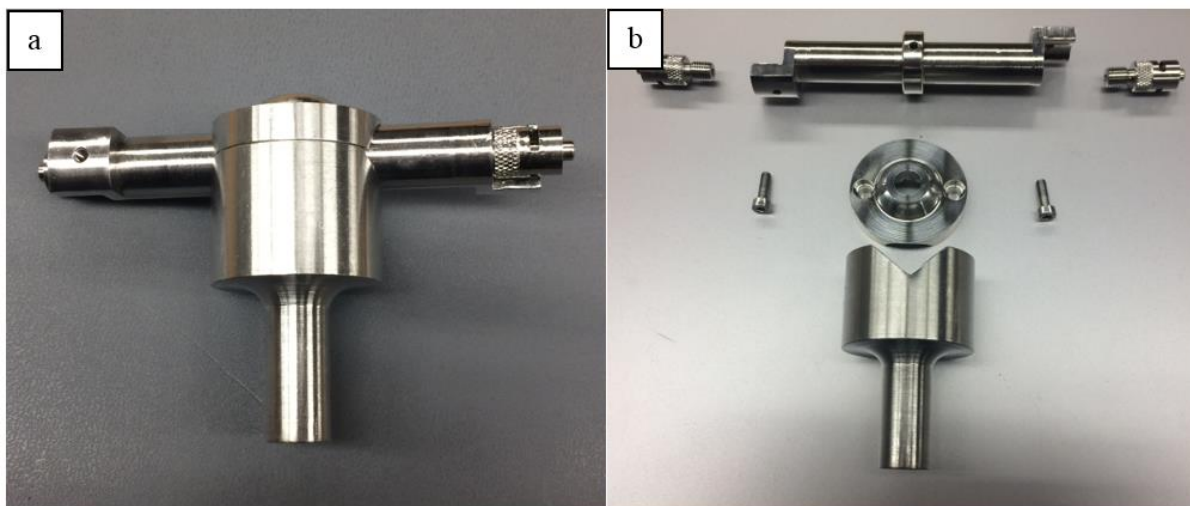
(a) Assembled Cyclone Spinneret; (b) exploded view cyclone spinneret.
